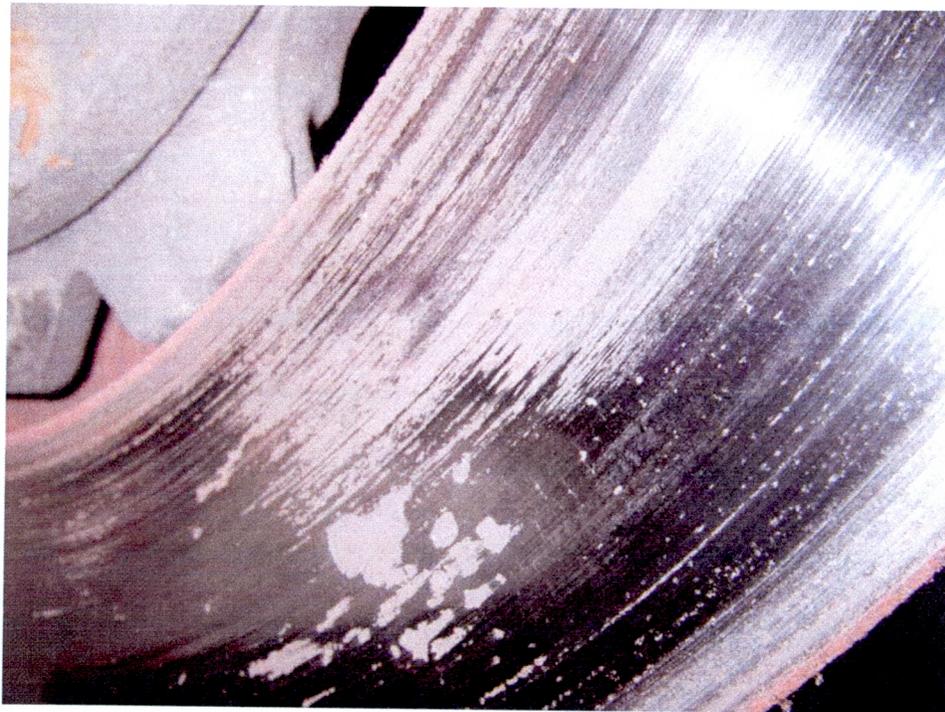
Left Rear Brake Rotor Showing the Material Transfer and Pitting of the Rotor Surface
